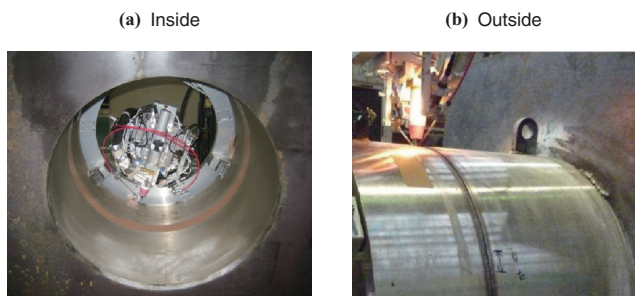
Situation of dissimilar metal pipe joint welding
